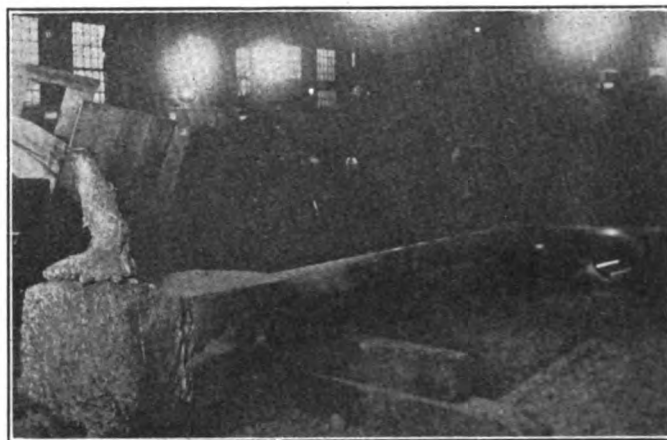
New end welded on connecting rod—Note sharp corners where break occurred.
